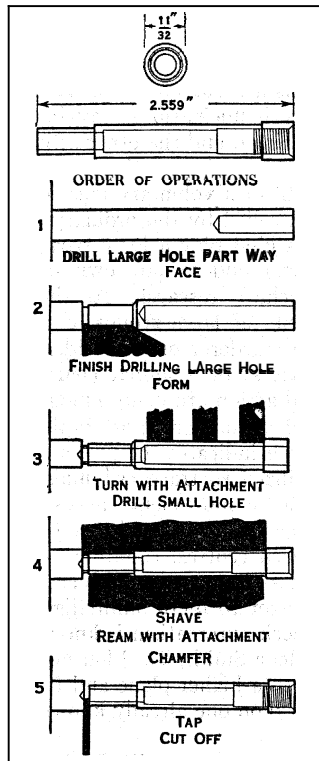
HOW A STEEL NUT IS MADE EVERY FIVE SECONDS ON A SIX-SPINDLE AUTOMATIC SCREW MACHINE
